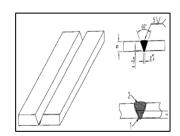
Illustration of a Welding Connection (Source: Ahmad Abi, et al. 2019)
